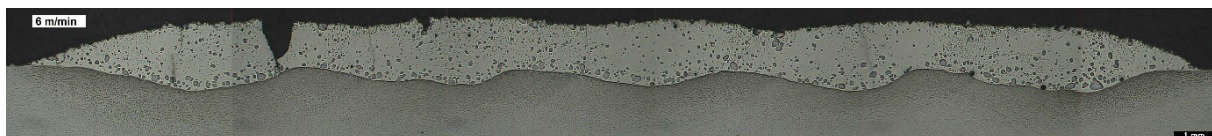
Test with adjacent beads at 10.39 - 10.41 wire feed speed 6 m/min. Too large penetration, cracking.
